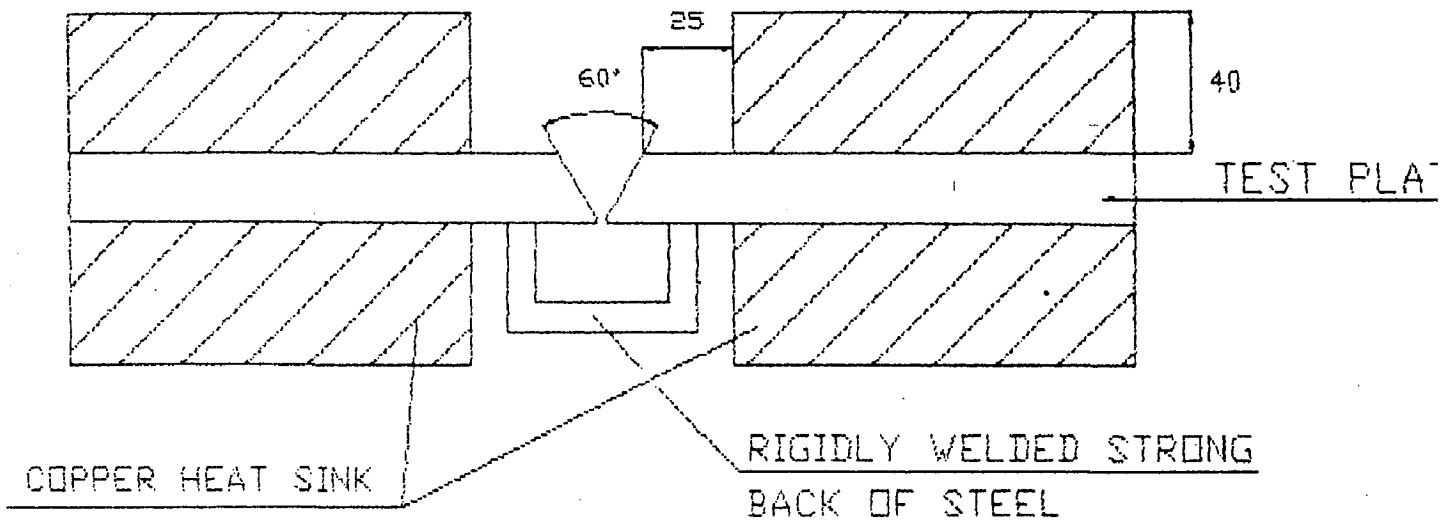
FIXTURE FOR WELDING OF PLATE
